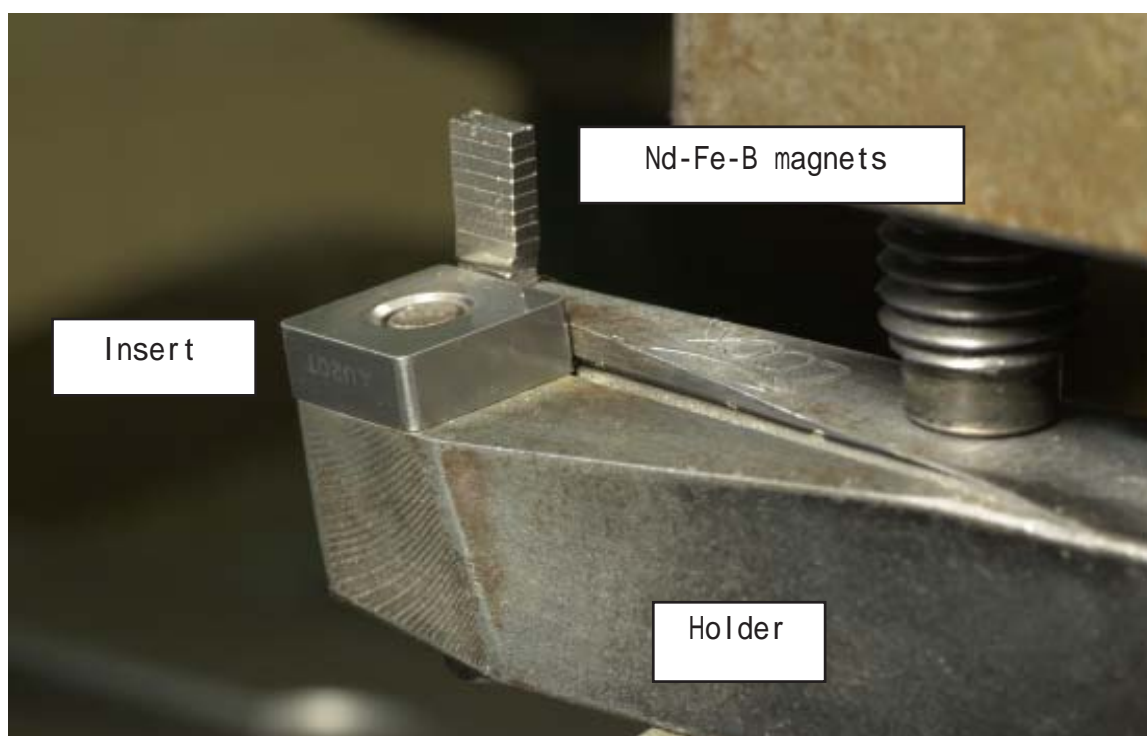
Tool holder and insert with Nd-Fe-B magnets
